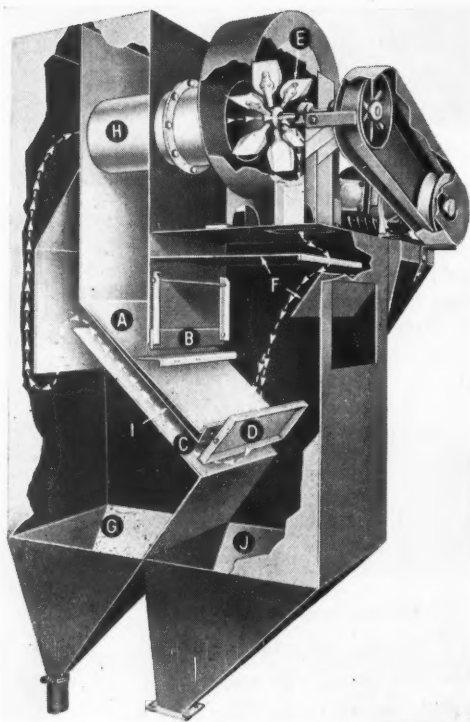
Cut-away view of the shot separator. Key to Parts: A—Inclined shed; B—Hinged gate; C—Outlet for broken shot; D—End baffle; E—Fan; F—Air baffles; G—Settling chamber for broken shot; H—Fan inlet; I—Adjustable baffle; J—Storage hopper.
